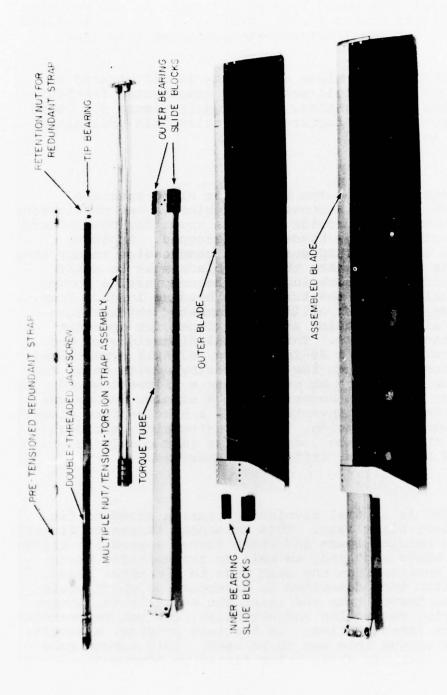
TRAC Dynamic Model Rotor Blade Components.
